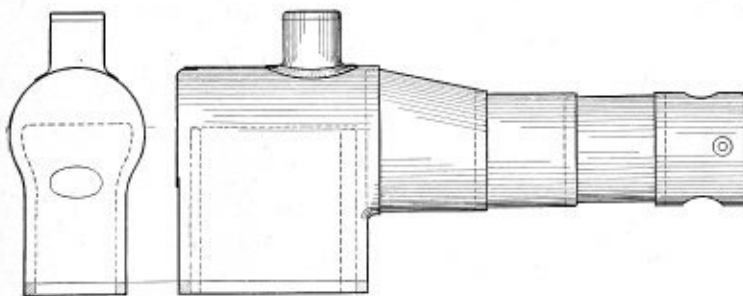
Sketch of Wagon-Top Locomotive Boiler
